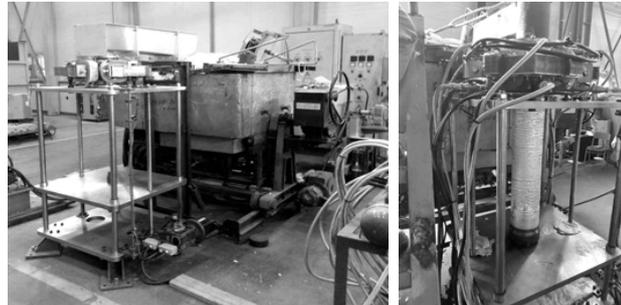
Photos pilot-plant installation for high-strength alloy casting from magneto-dynamic installation semi-continuously billet casting and 7" billet casting process, (analog 7075 alloy)
